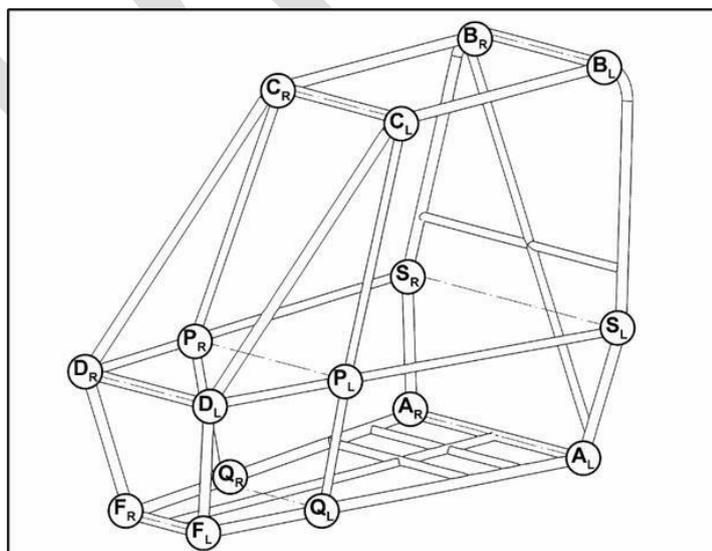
Roll Cage, Named Roll Cage Points, Front Braced Frame
